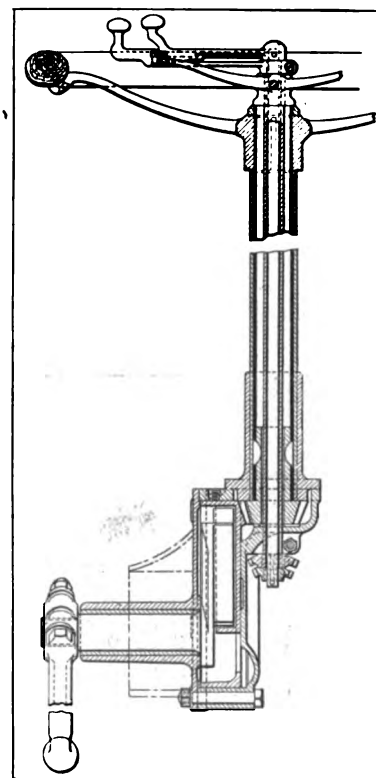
Section of a steering gear showing the relations of a bevel gear and pinion for this service
